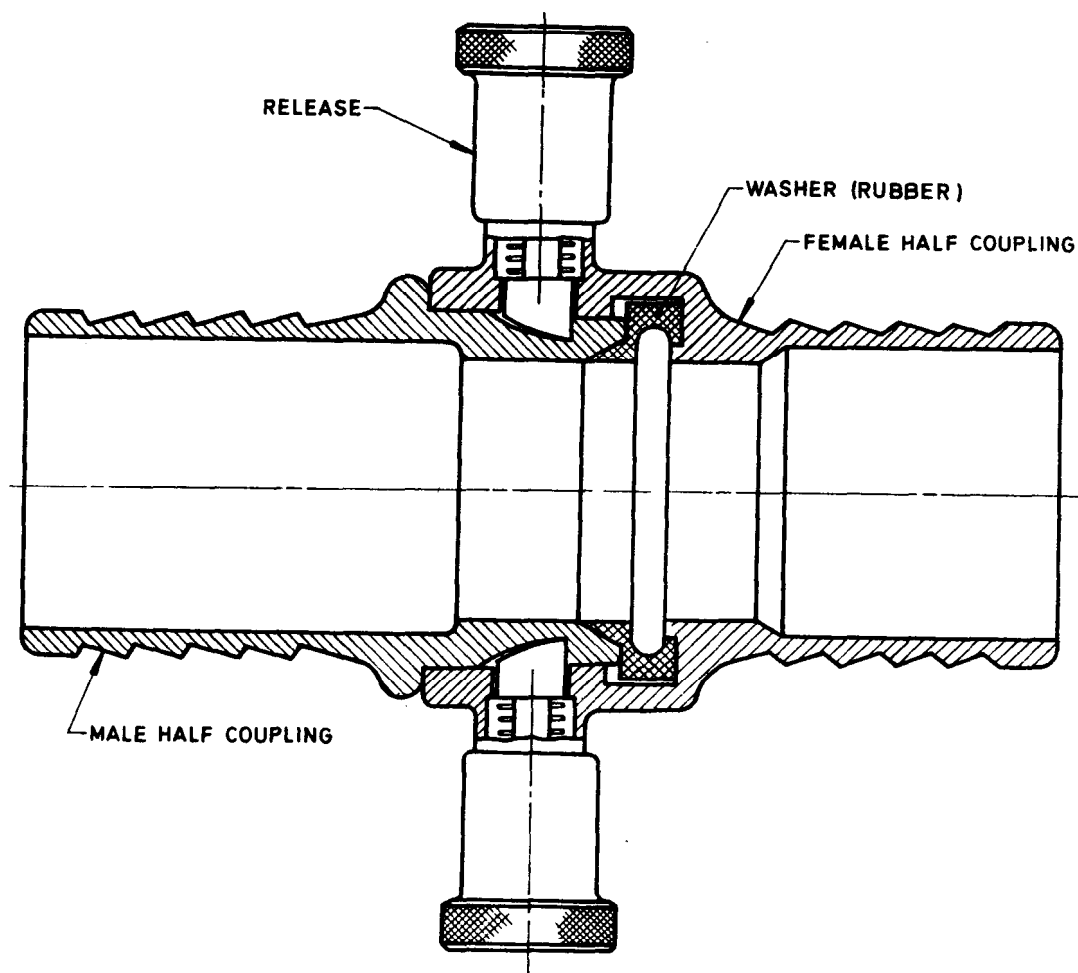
ASSEMBLY OF DELIVERY HOSE COUPLINGS
